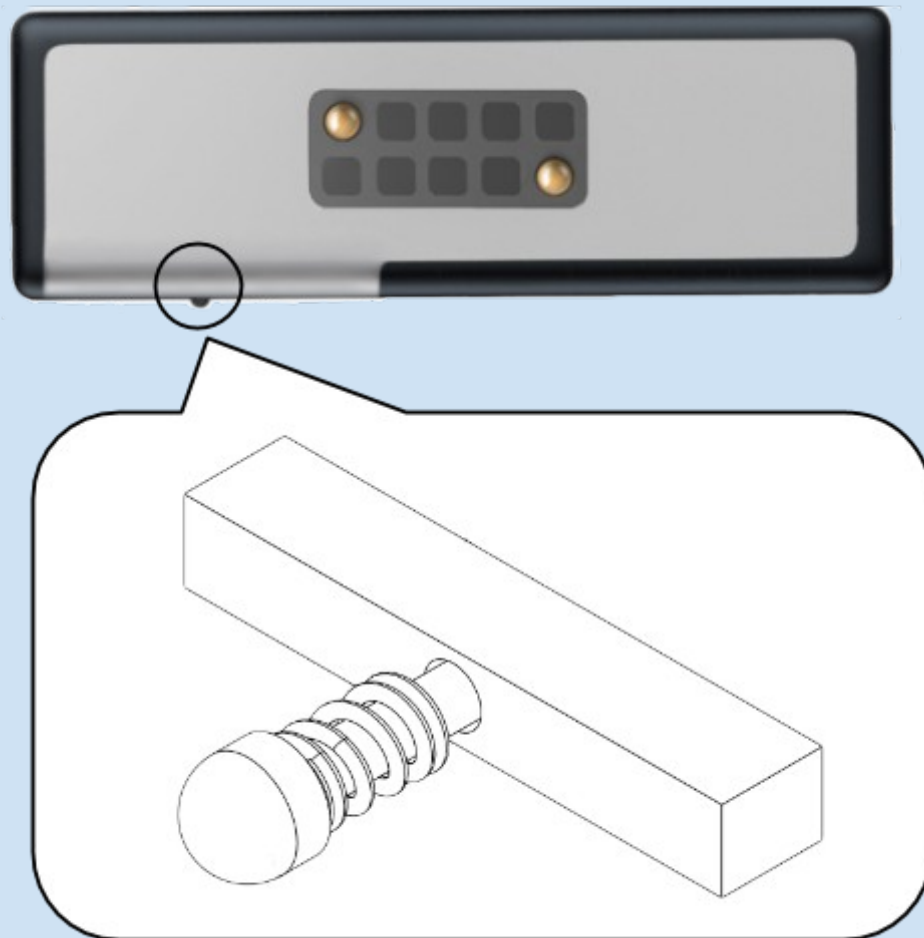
Prototype Ball-Spring Plunger Assembly
